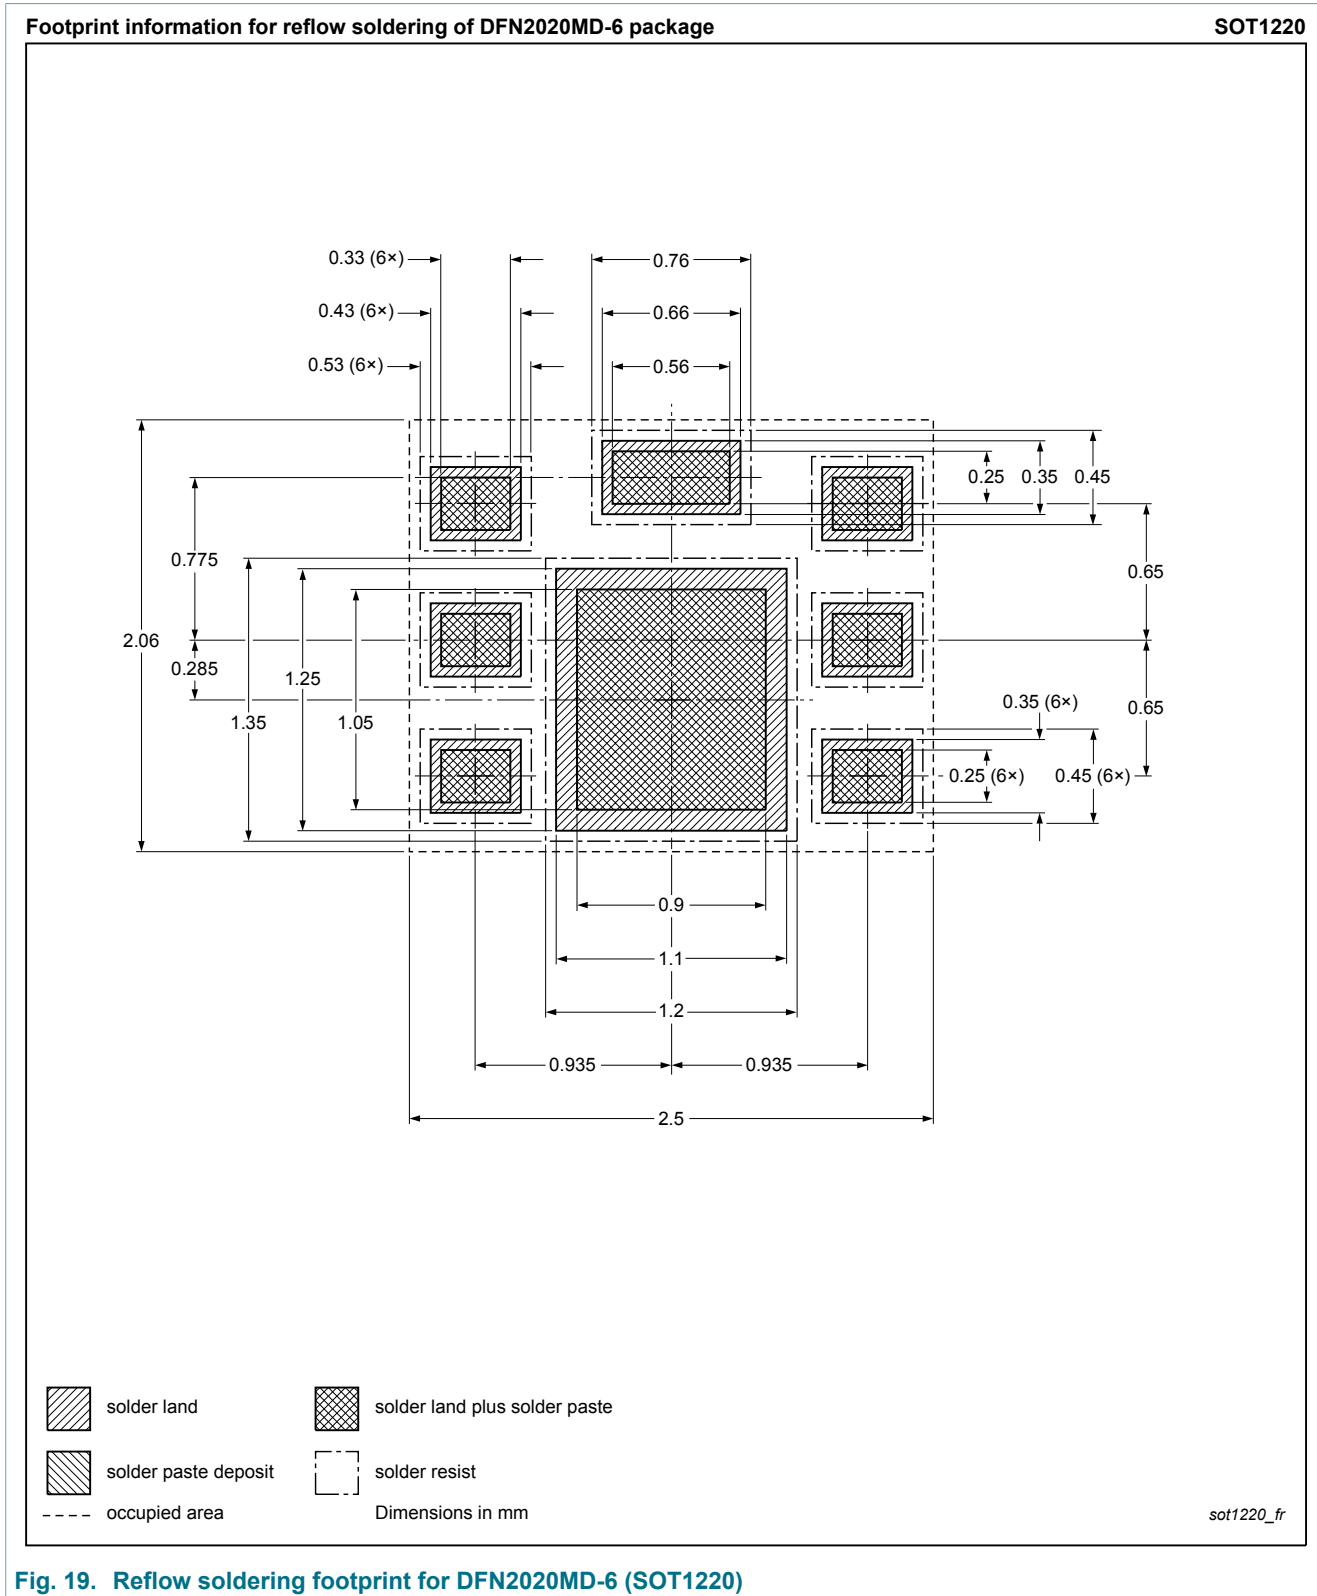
Reflow soldering footprint for DFN2020MD-6 (SOT1220)
